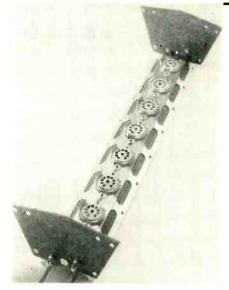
FIG. I—Top view of six-gang chassis using basic chassis shown at right. Closeups of assembly are shown in Fig. 5 and 6
